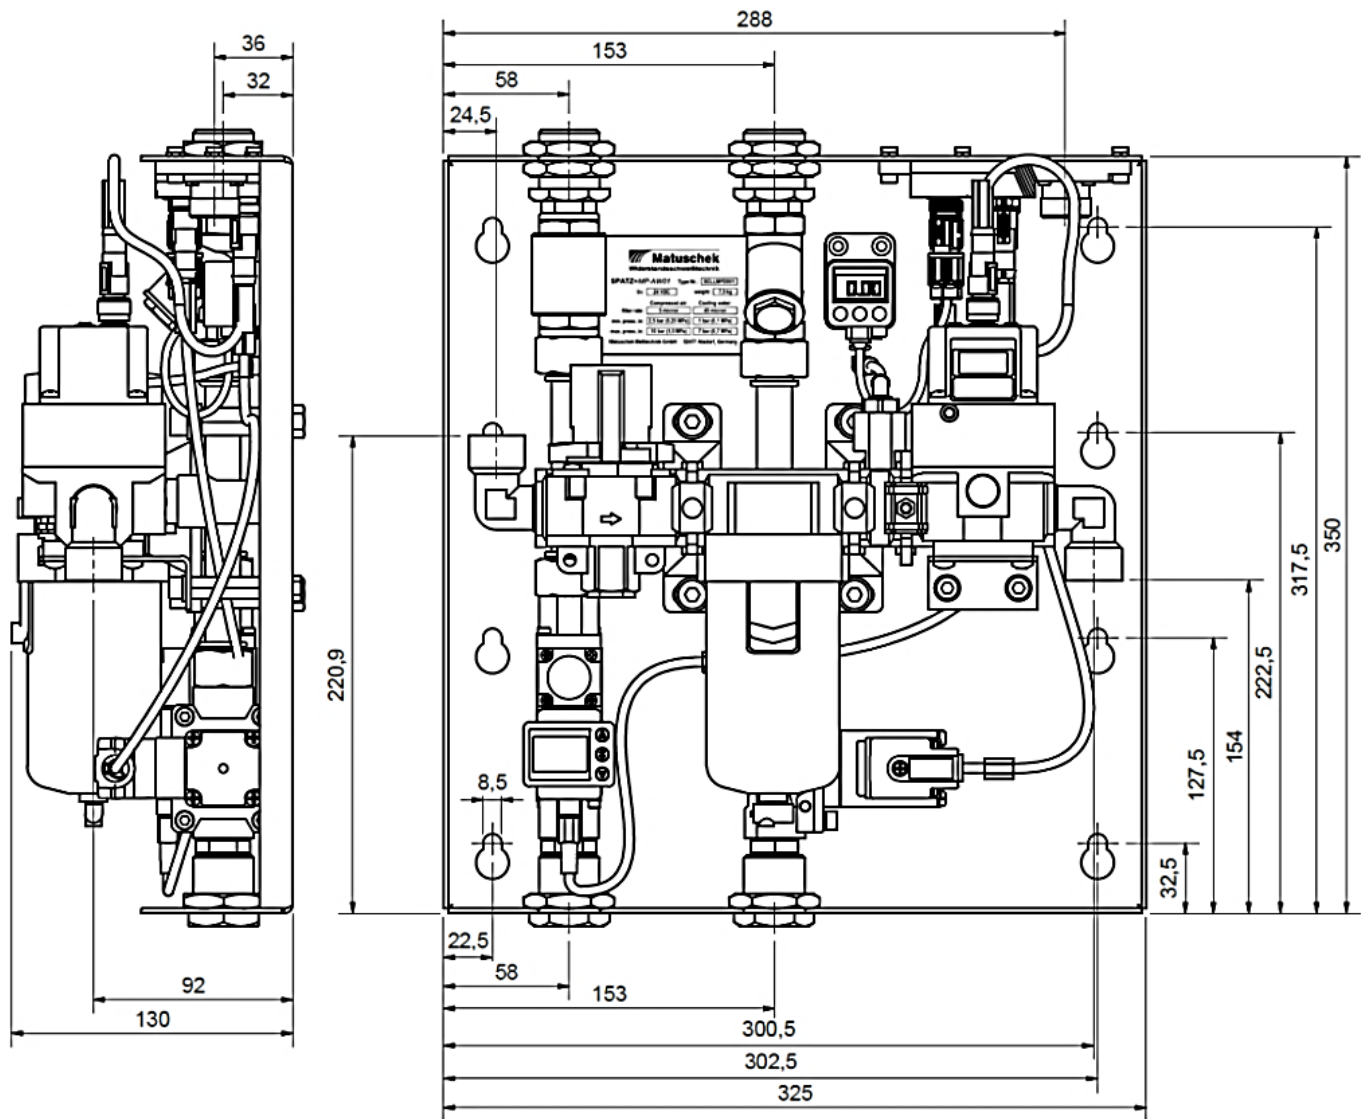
Dimensions of the SPATZ+ MP-AW Media panel for one gun in mm
